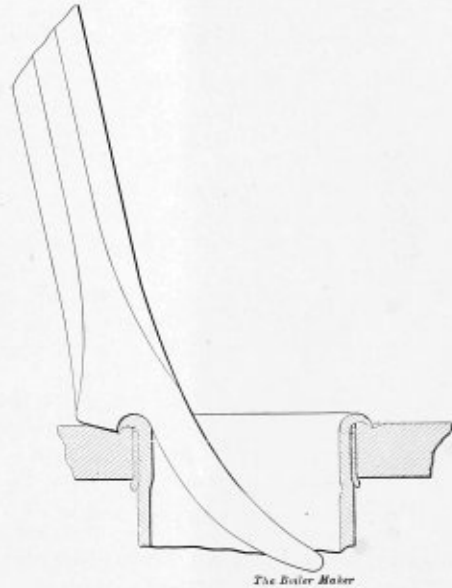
DAMAGING EFFECT OF OLD-STYLE TOOL.
